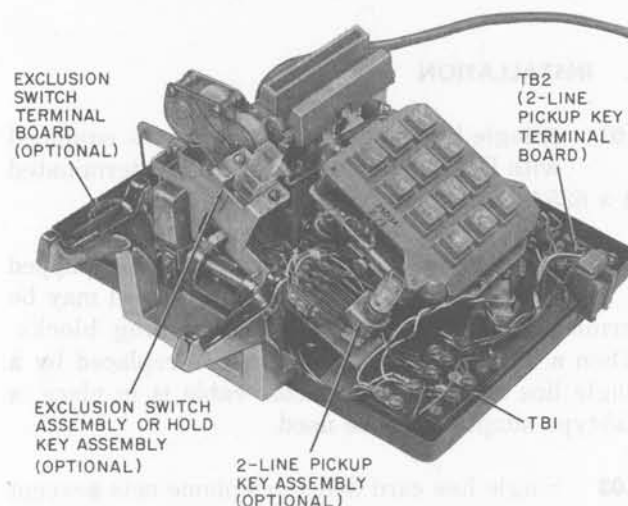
Mounting Location for Optional Components in 1660- and 2660-Type Telephone Sets
